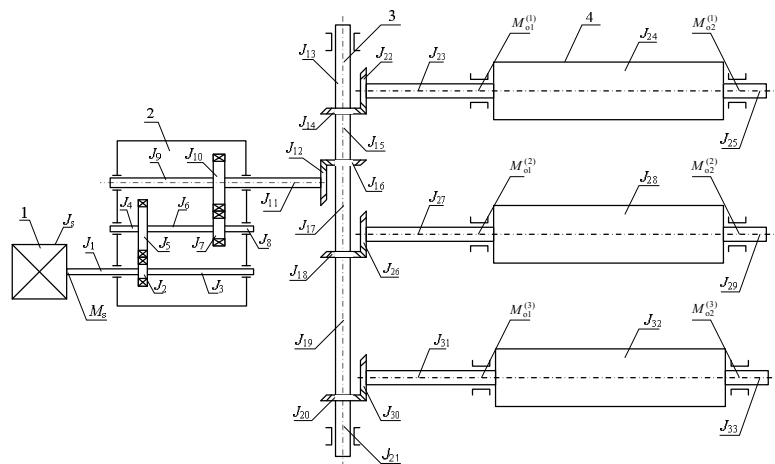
Kinematic scheme of the roller line section with three rollers linked by gear transmission: 1 – IM; 2 – double step gear box; 3 – transmission with conical gears; 4 – transport roller
